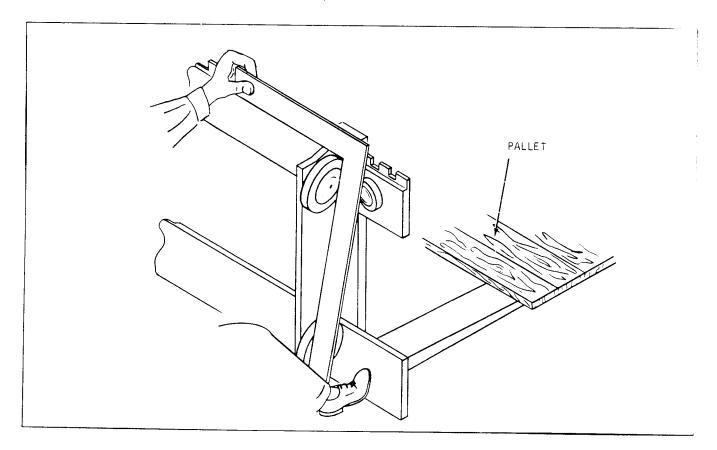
Squaring Carriage Rollers (Four Roller Carriage)
